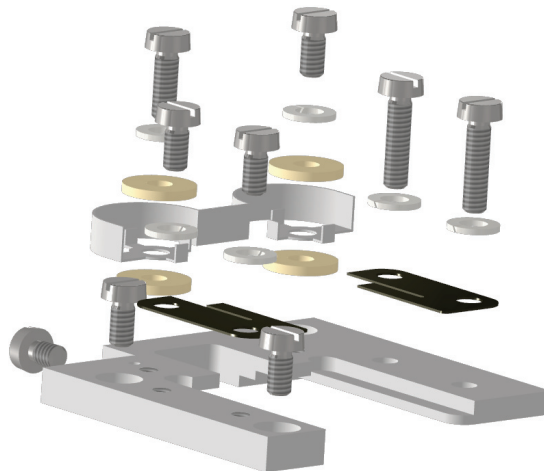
Exploded view of the redesigned sputtering and annealing stage. The springs establishing the contact to the transferable thermocouple of the SPECS-type sample holder can be mounted to two holes located on both sides of the widened opening.
